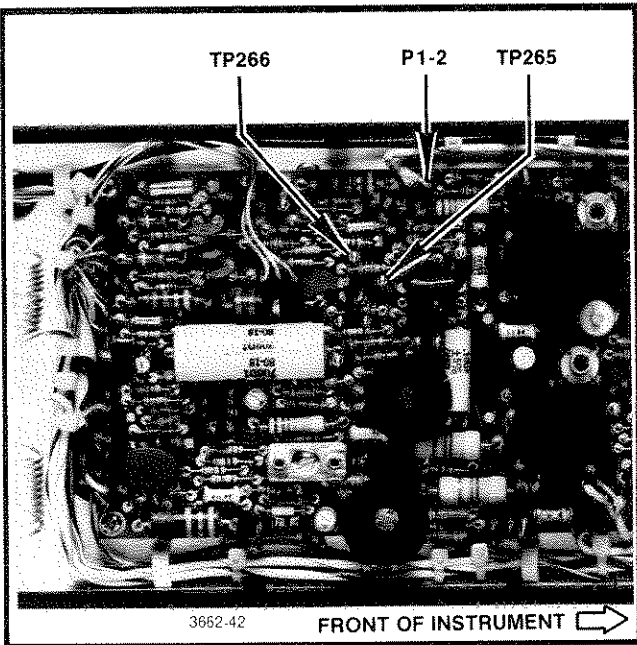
Partial view of the Main board, showing locations of TP265 and TP266 near the rear of the board. These test points should be jumpered together for YRGB operation.
